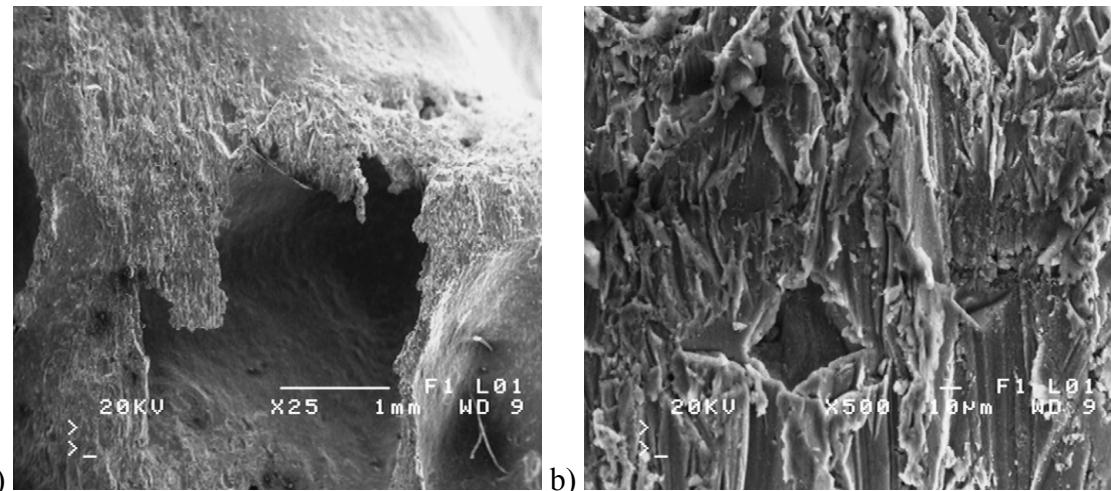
a) and b) Macroscopic images of the surface after EDM cutting
